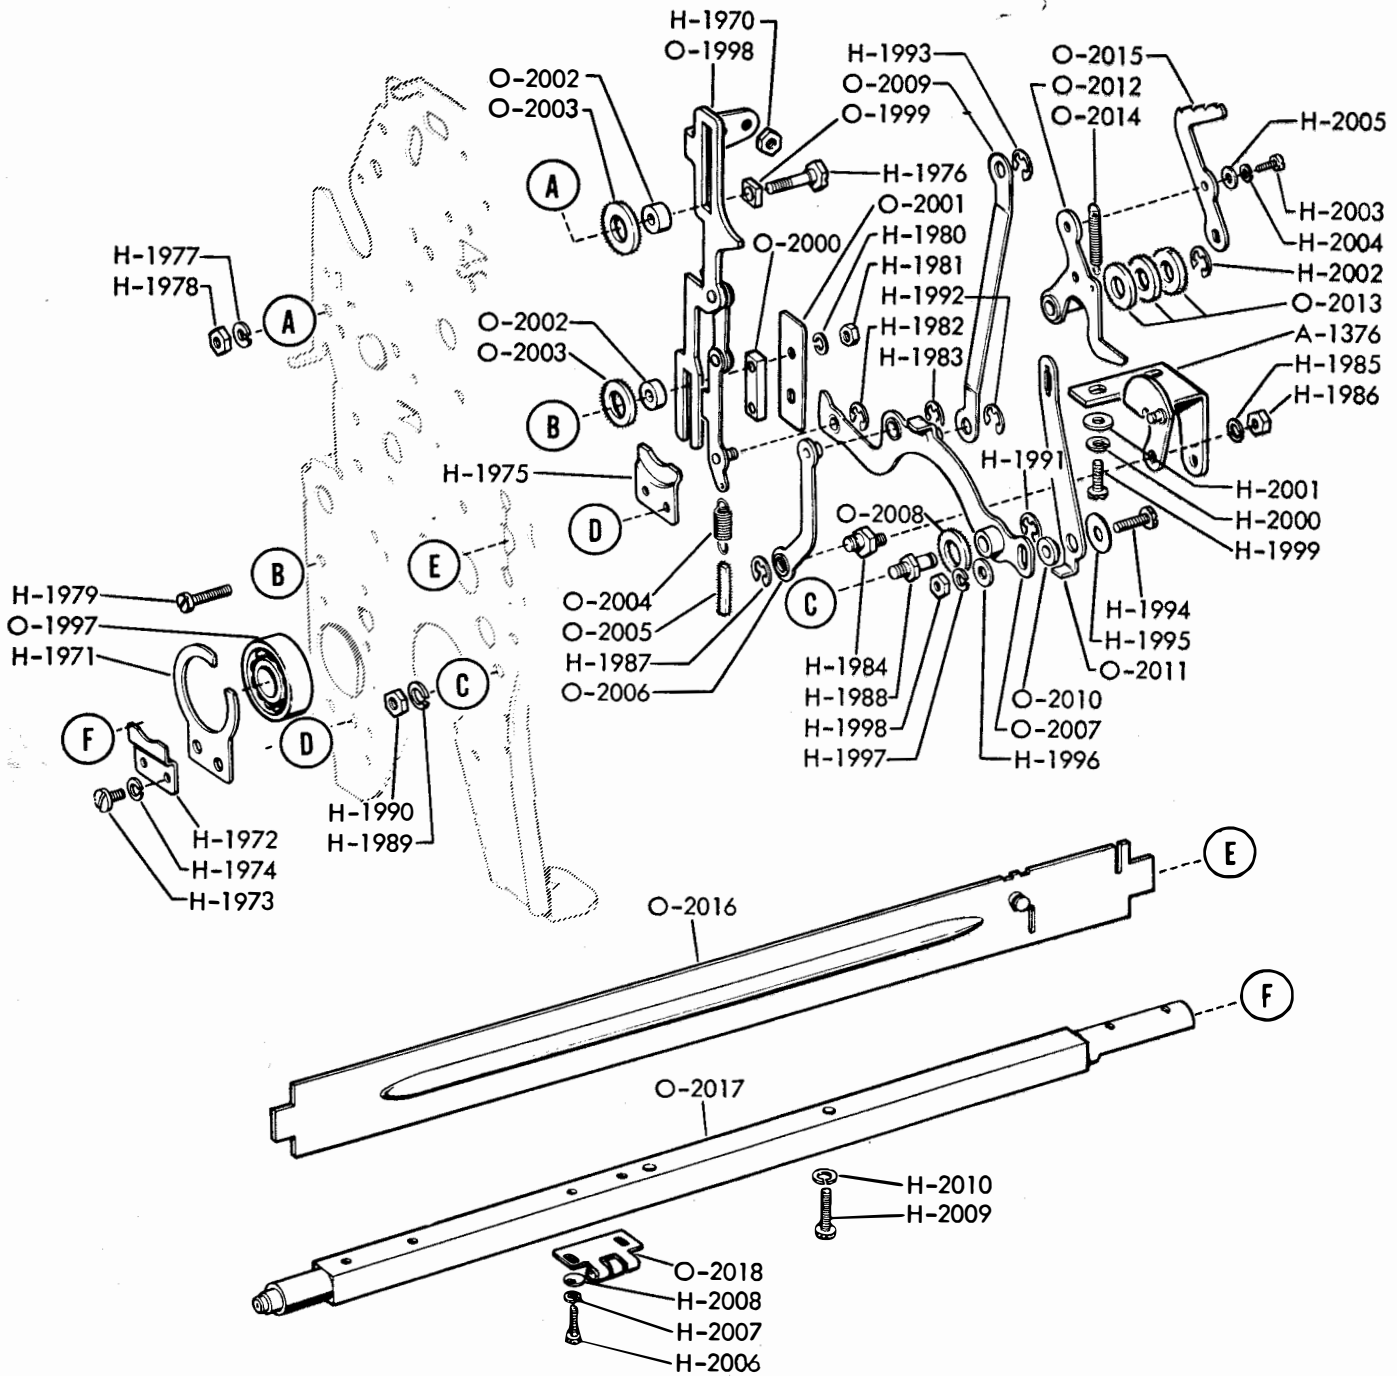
Automatic Typewriter, Left Side Linkage and Stripper Blade Mechanism
